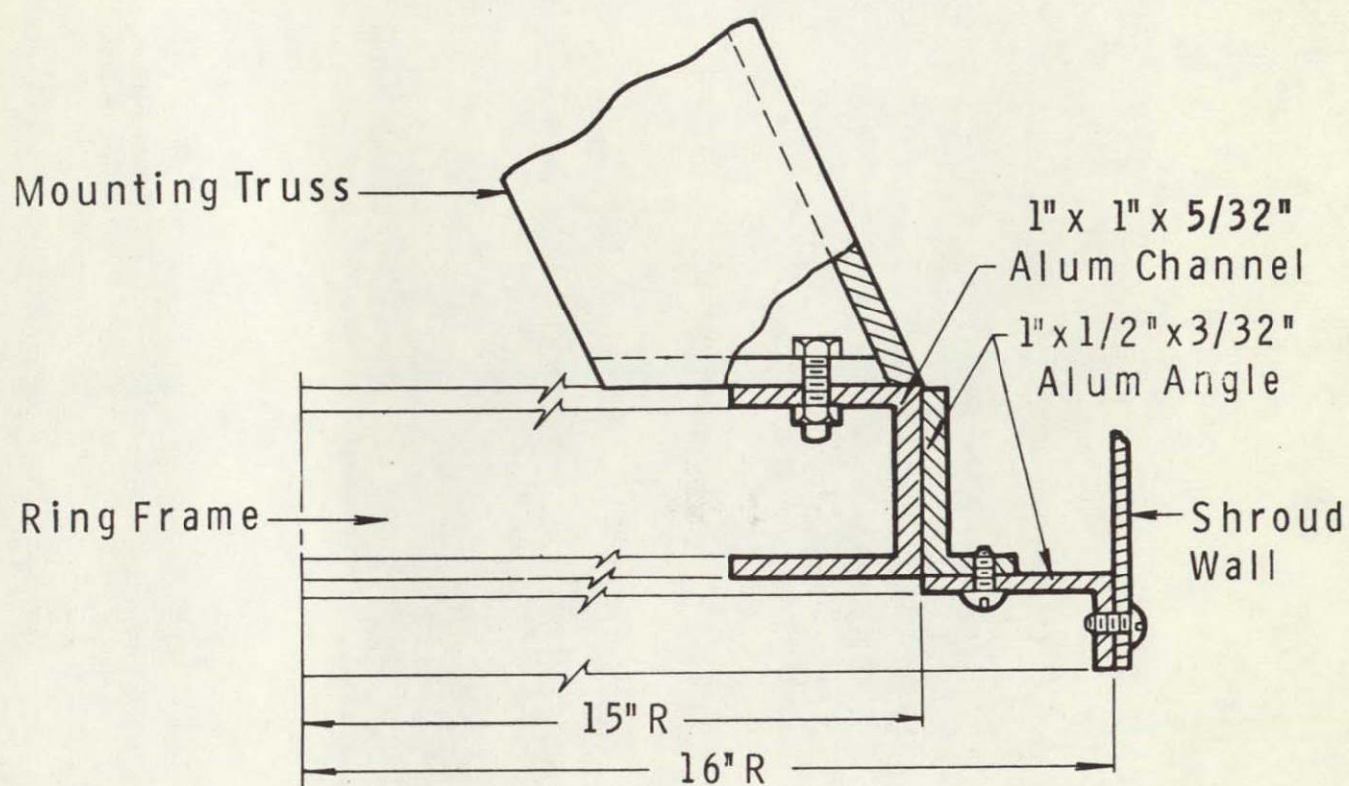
MODEL RING FRAME TO MOUNTING TRUSS CONNECTION
